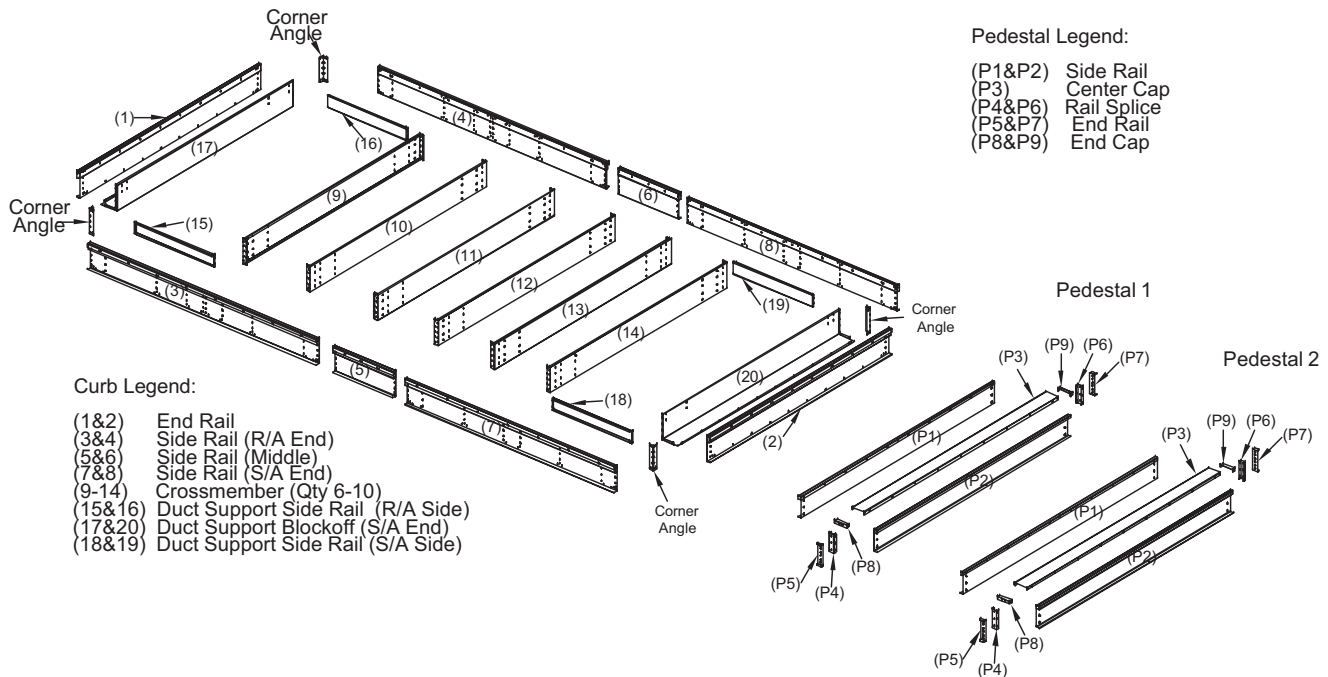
One-piece unit—curb and pedestal component layout drawing<sup>(a)</sup>
